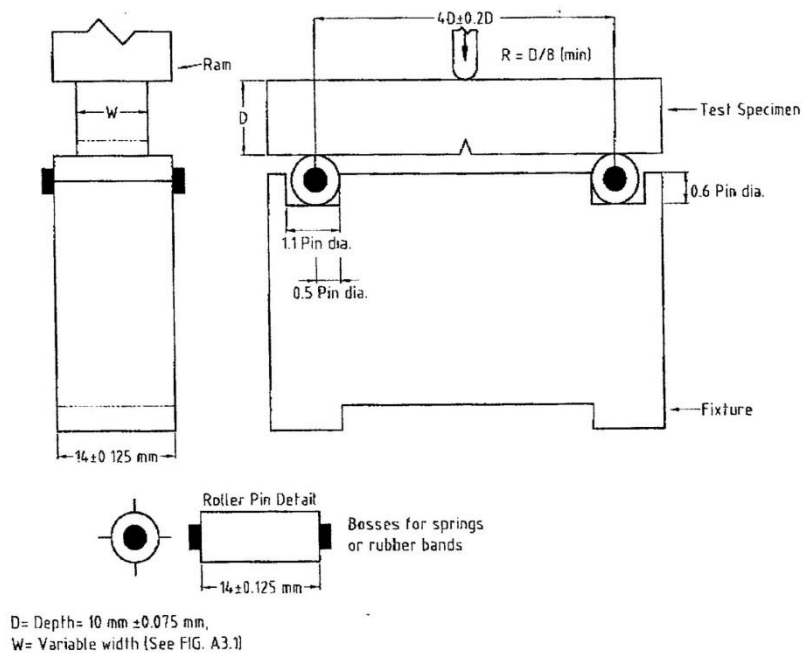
Fatigue Precracking-Fixture Design
